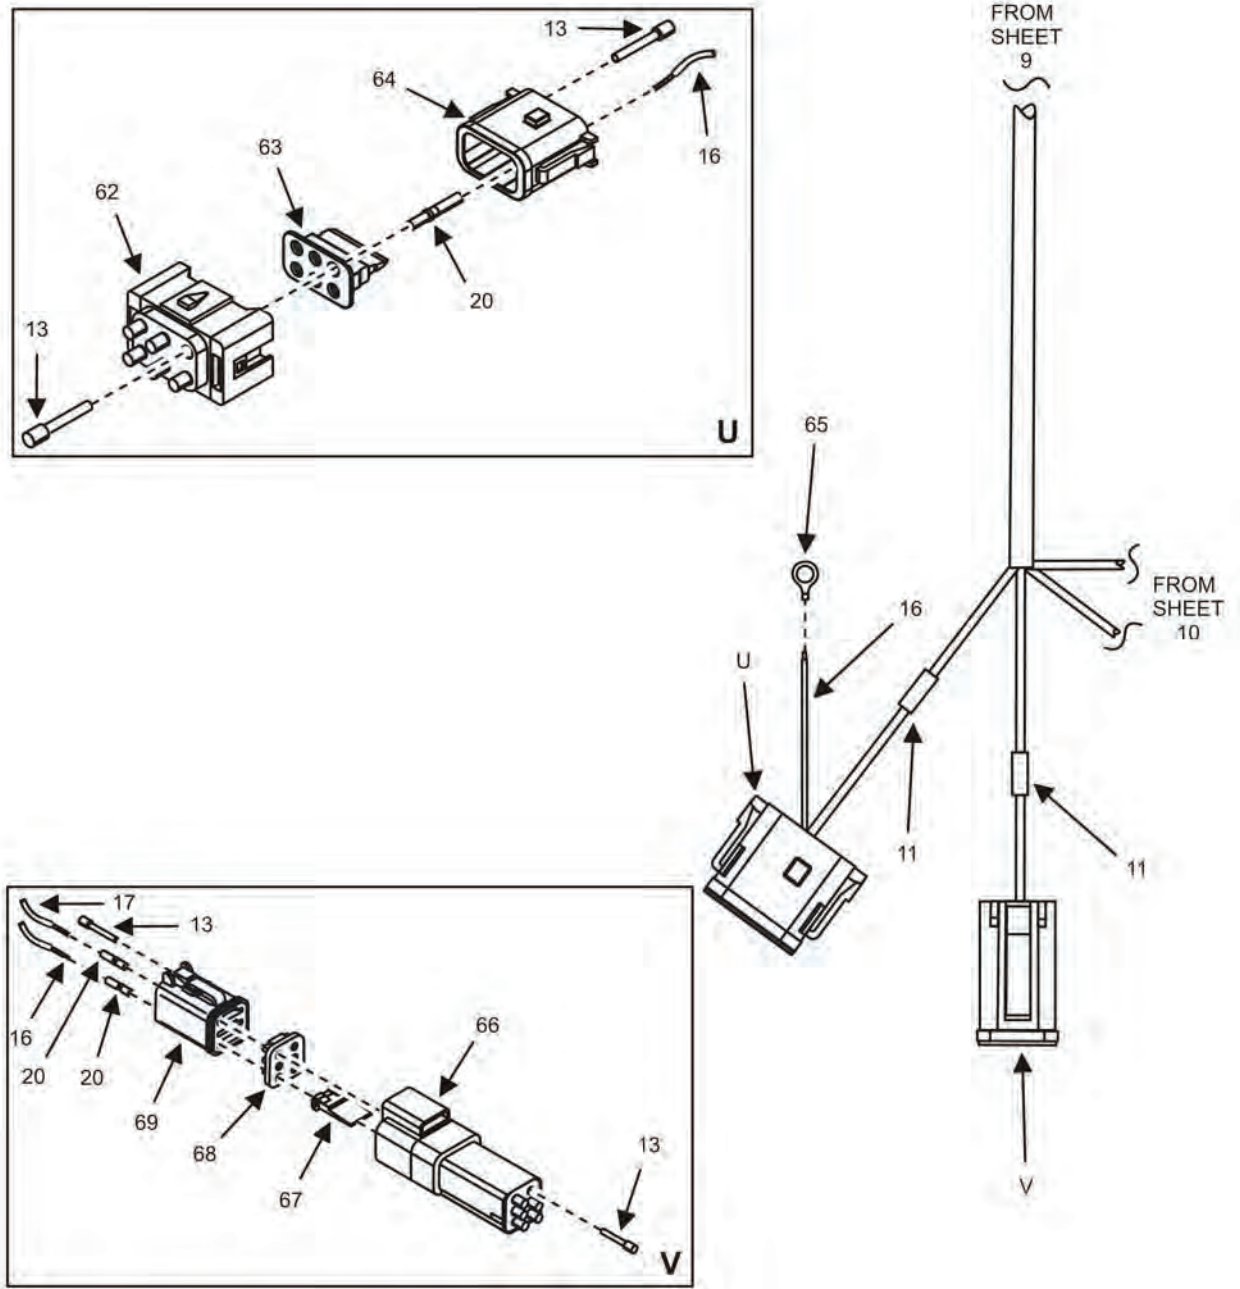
Engine Wiring Harness (Sheet 11 of 13).
